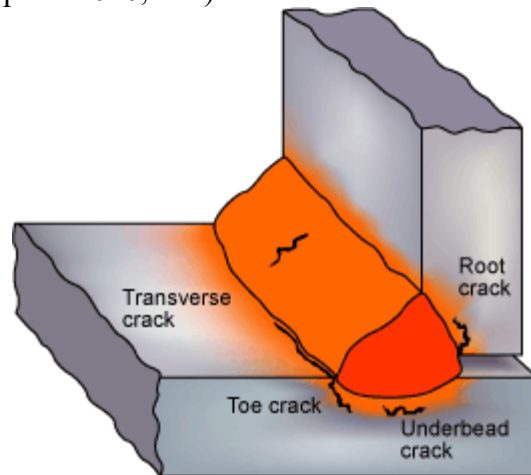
Presence of Hydrogen cracks in weld bead. (The welding institute 2010.)
